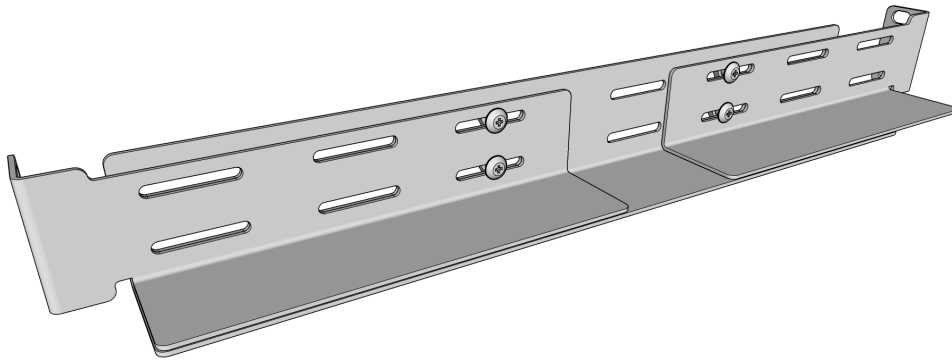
RipEX2-HS/RD/RS adjustable rail
